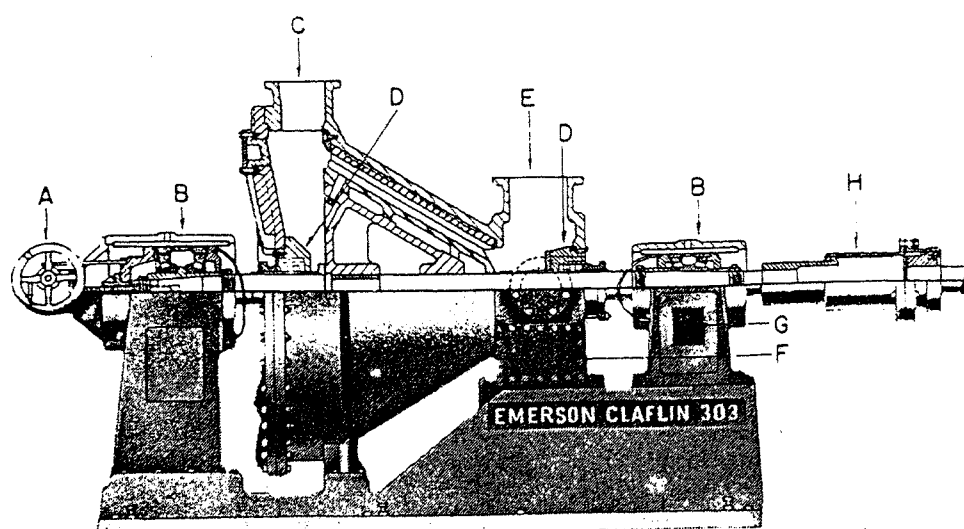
Emerson Claflin refiner. (A) Plug adjustment mechanism, (B) bearing assemblies, (C) stock outlet, (D) packing boxes, (E) stock inlet, (F) cleanout, (G) oil-mist lubrication, (H) coupling, coupling. (Emerson Mfg. Co.)
